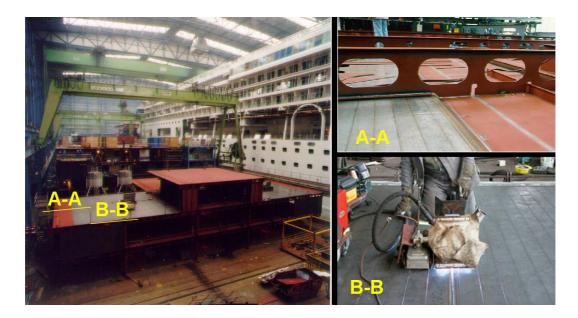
typical joints between all-metal sandwich panels, and to conventional deck platings (source: Meyer Werft).
